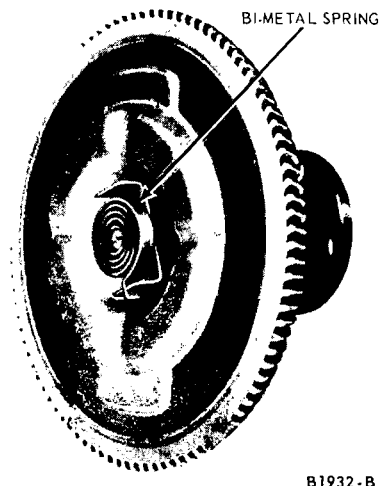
Fan Drive Clutch With Coil Bi-Metal Spring
